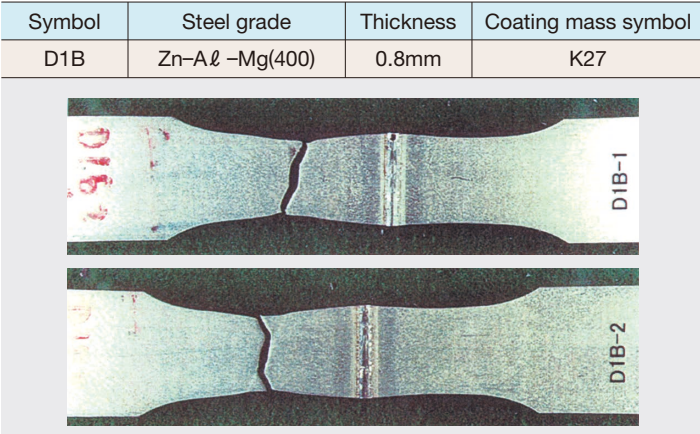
Fracture Conditions in Tension Tests for Lap Fillet Weld Joints (thickness: 0.8 mm)
